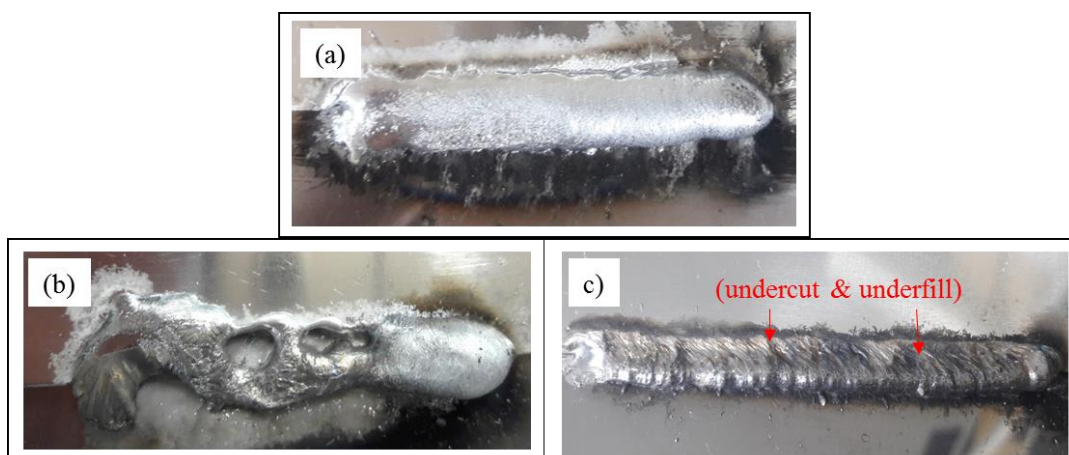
(a) Example of good weld condition in pulse plasma MIG welding, (b) example of bad weld condition in pulse plasma MIG welding at the MIG current more than 140 A, and (c) example of bad weld condition in pulse MIG welding at MIG current less than 70 A
